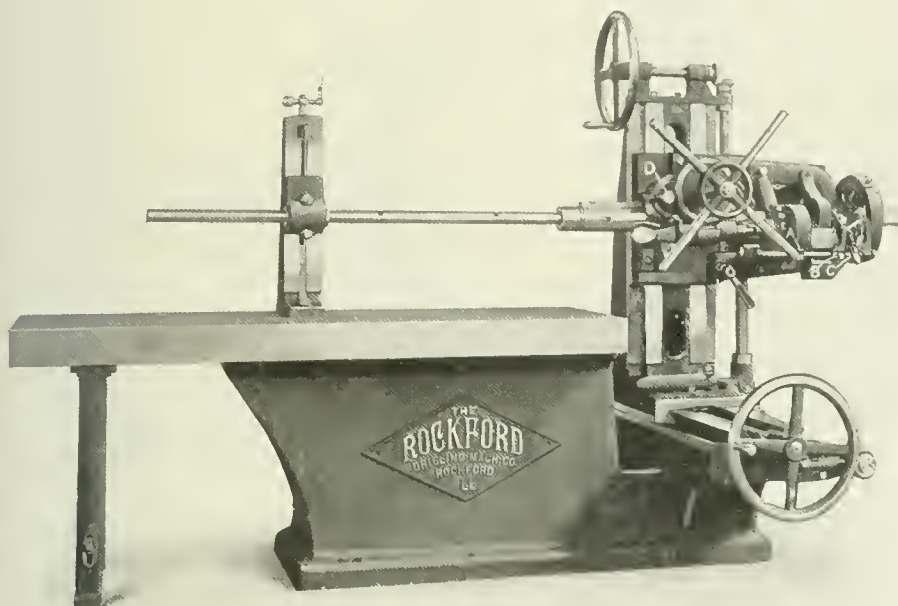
Rockford No. 2 Horizontal Boring Machine
